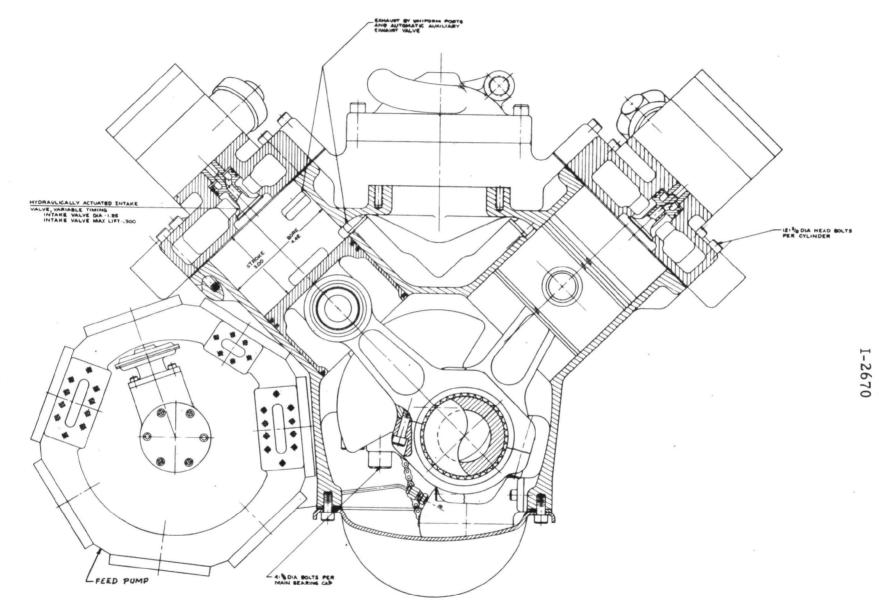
Expander Layout with American Bosch Hydraulic Valving - Cross Section Through Front Cylinders.
